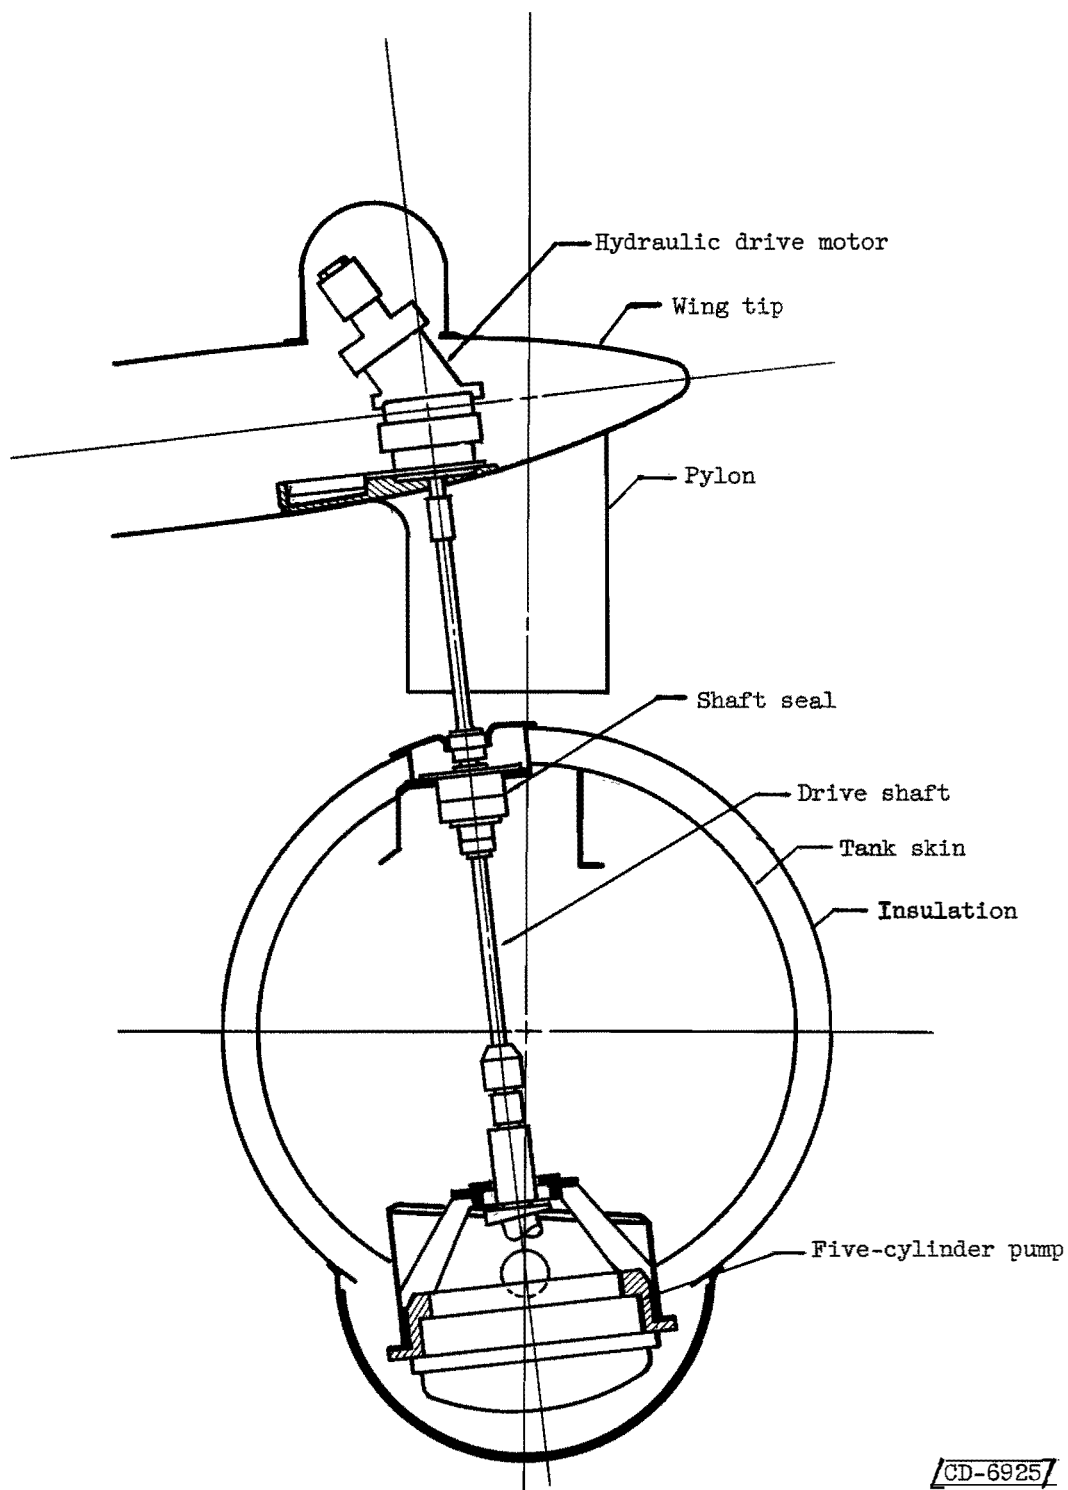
Front view of pump and drive-motor installation in wingtip tank.
